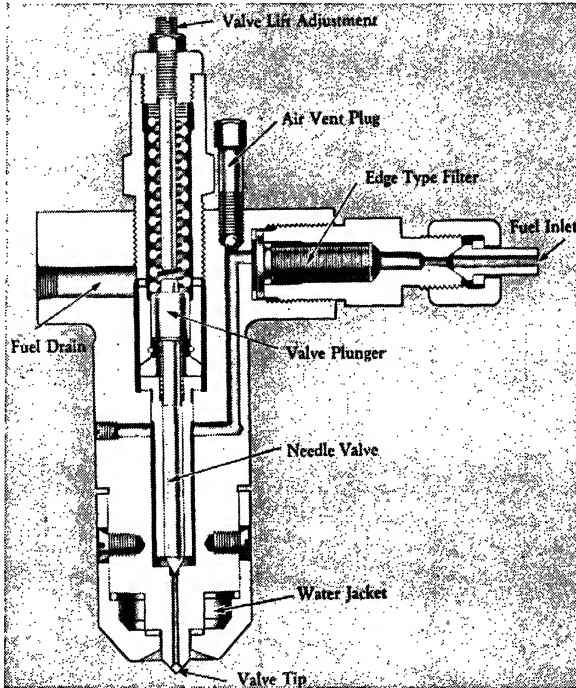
Spring-loaded injection nozzle. (Courtesy Fairbanks Morse & Co.)
